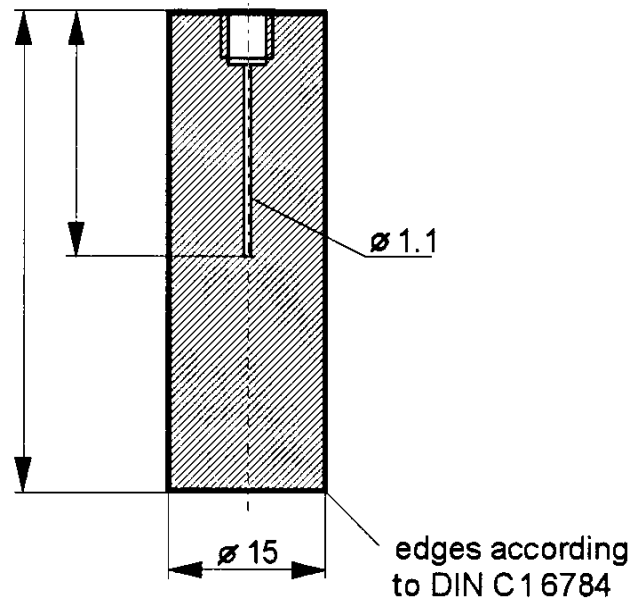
The tested probe geometry with thermocouple hole and dimensions
